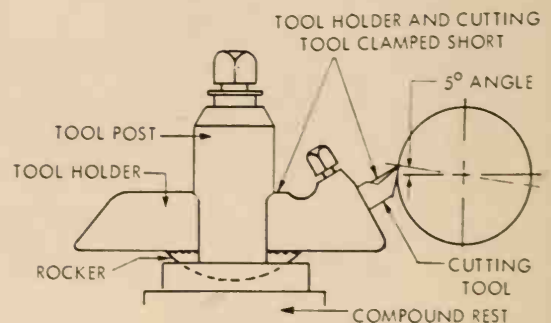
Tool holder and cutting tool properly adjusted.
